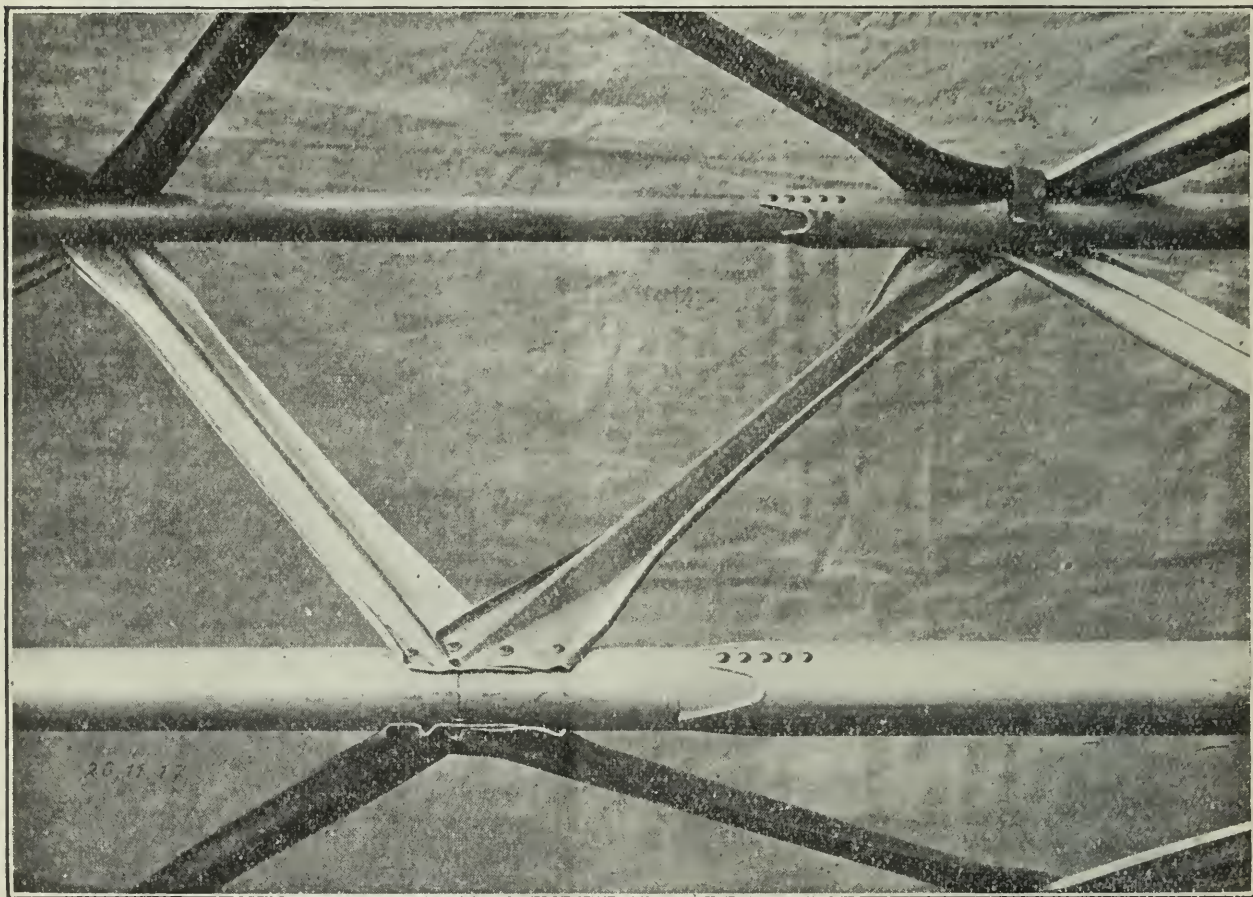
Connection of tubes with each other (telescope joints) and with struts (riveting).
